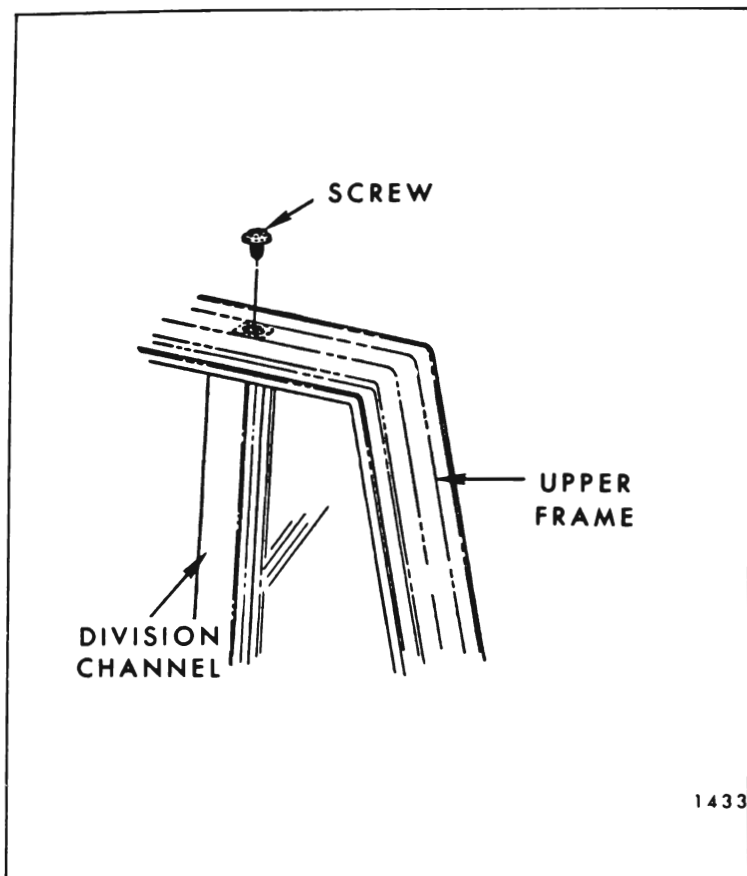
Rear Door Ventilator Attachment - "X" Styles
